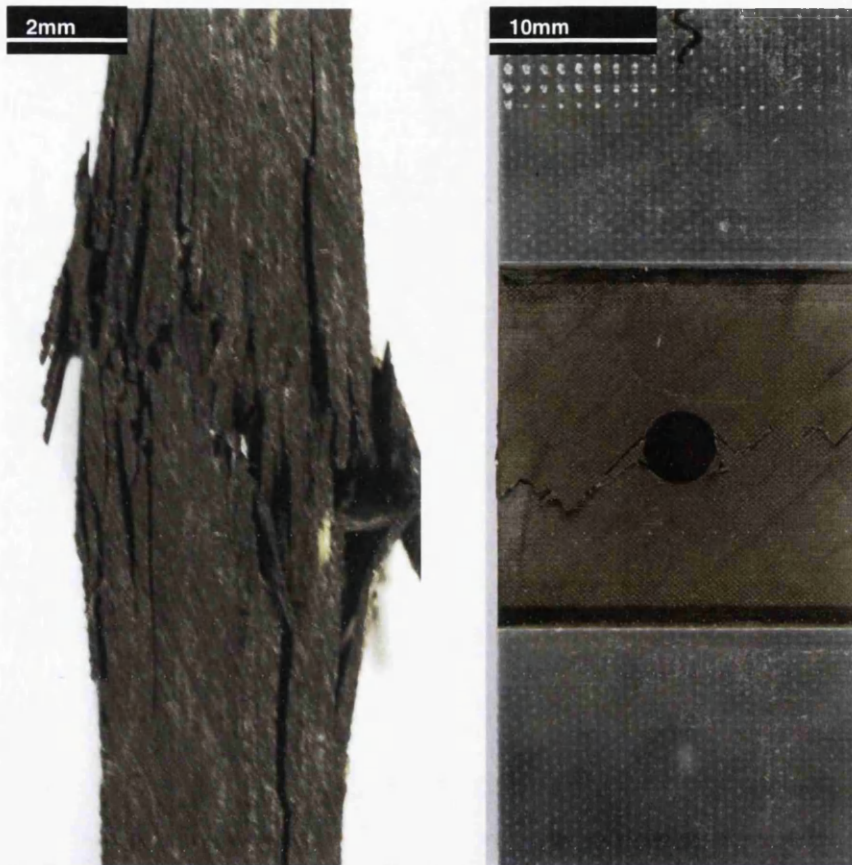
Typical open-hole compression failure, showing “kink zones” and fracture.
